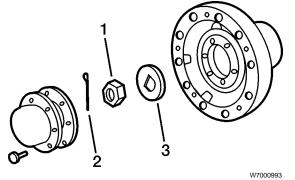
Single nut adjustment, with cotter pin and D-type washer
